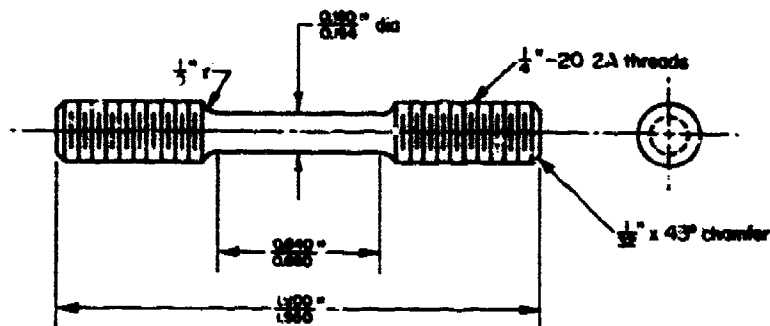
Tensile specimen (short transverse direction) for 2-1/2-, 2-3/4-, and 3-inch diameter Inconel 718 and Inconel 625 bars. Drawing 10T.
